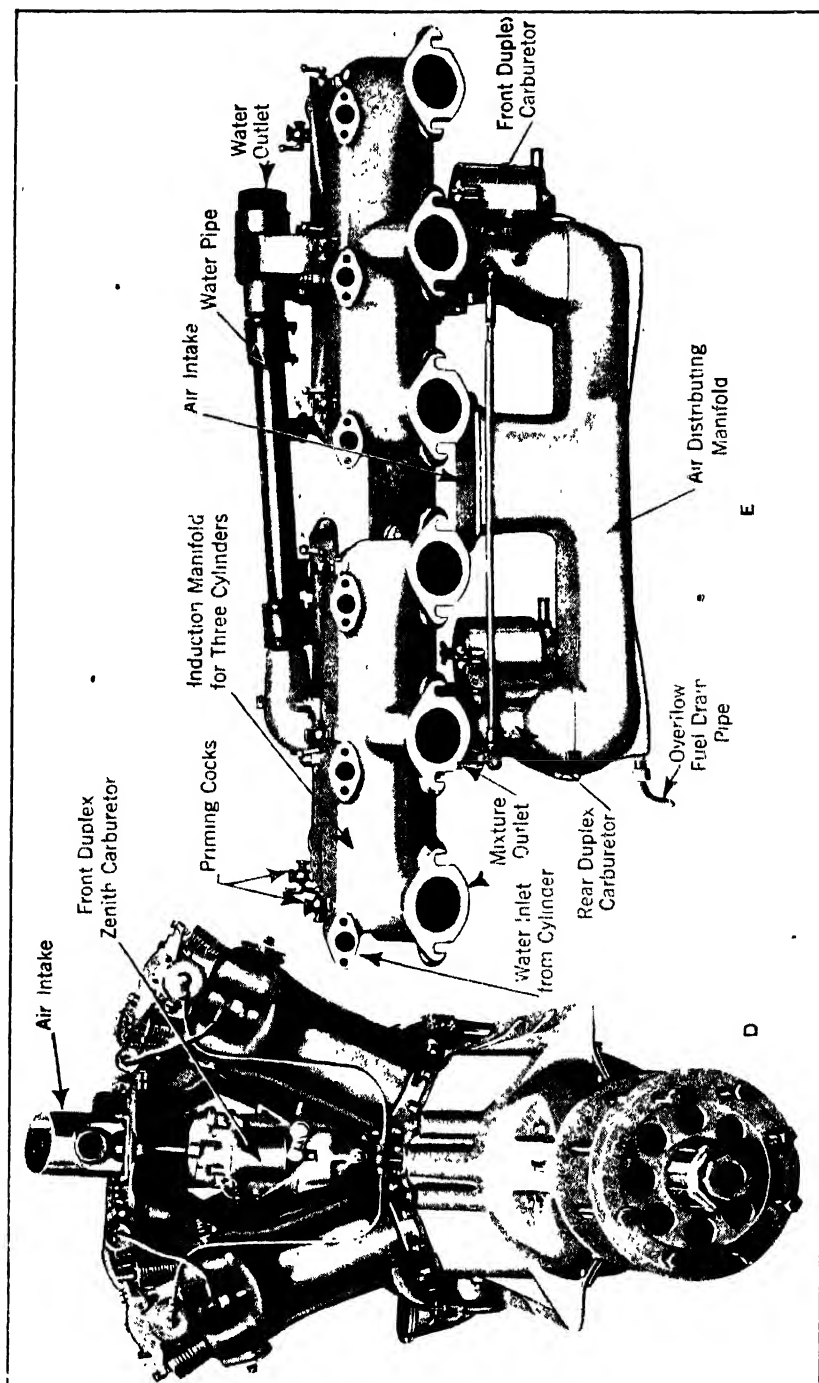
, con't.—D—How Carburetor is Mounted on Liberty Engine between Cylinder Banks. E—Carburetors and Induction Manifolds of Liberty Airplane Motor Removed from Cylinders.
